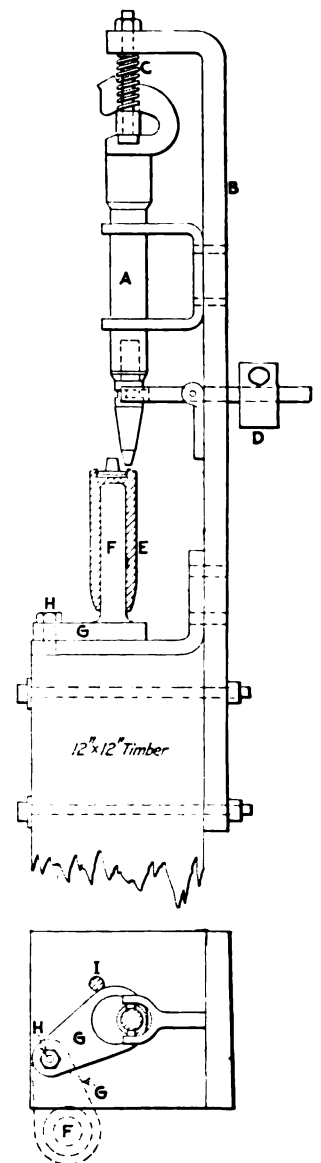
PNEUMATIC HAMMER ARRANGED FOR RIVETING
